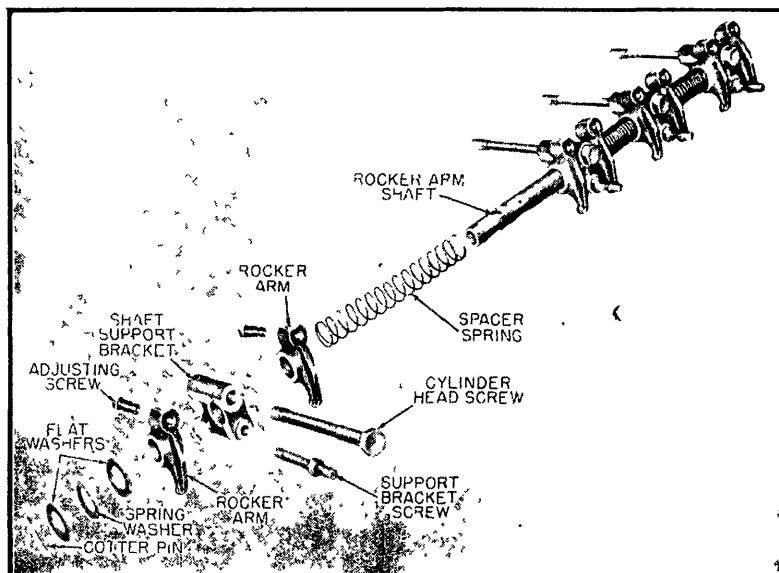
Rocker arm assembly, 1951-52 V8 engine
